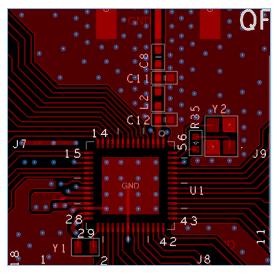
Top layer design for 4-layer PCB (QFN56)
